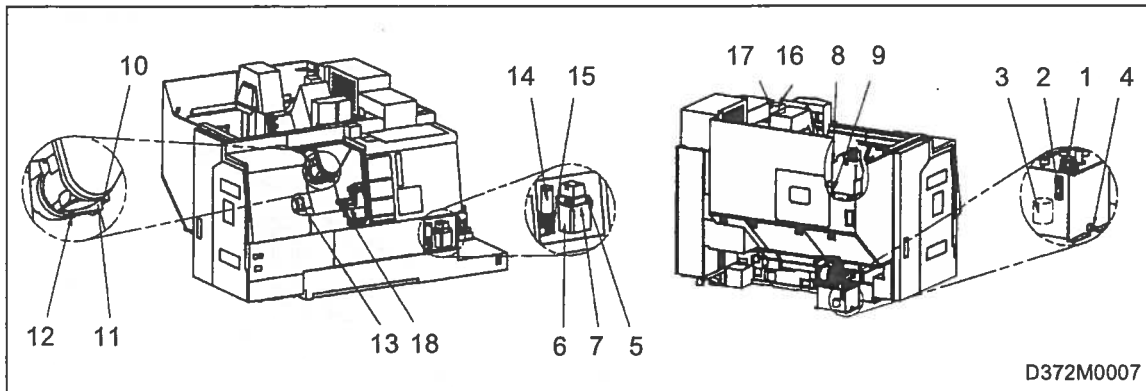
Location of lubricating points (INTEGREGX 100-III)
